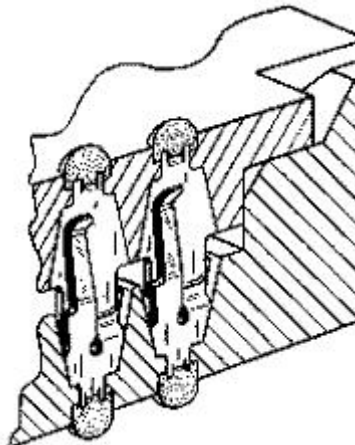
Cut-away view of the mated MEG-Array® connectors showing mated terminals and solder balls.
